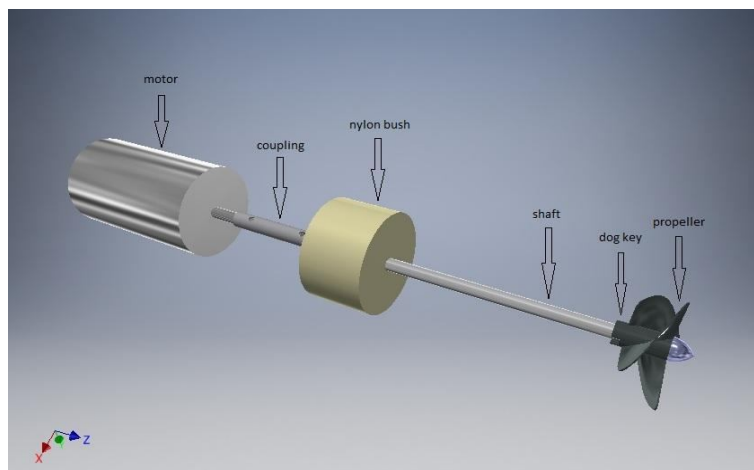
PARTS AND ASSEMBLY OF JET DRIVE
